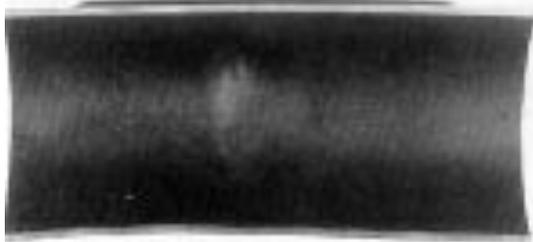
The same part. The traces of pre-welding heating can still be seen intact after 10 years.
